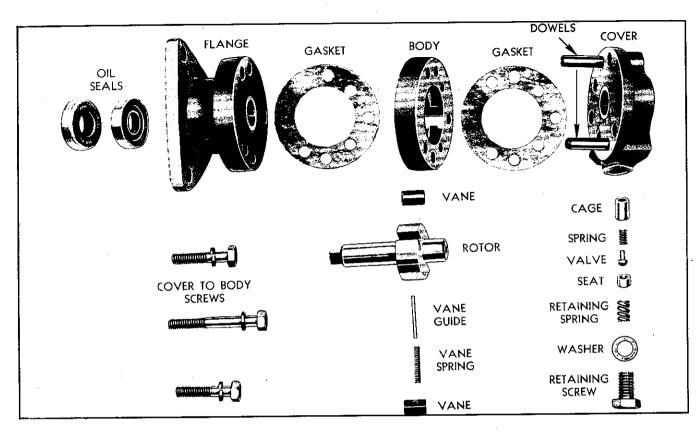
Fuel Oil Pump Details and Relative Location of Parts.
